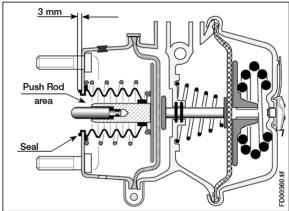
DRIVE AXLE BRAKE AIR CHAMBER
